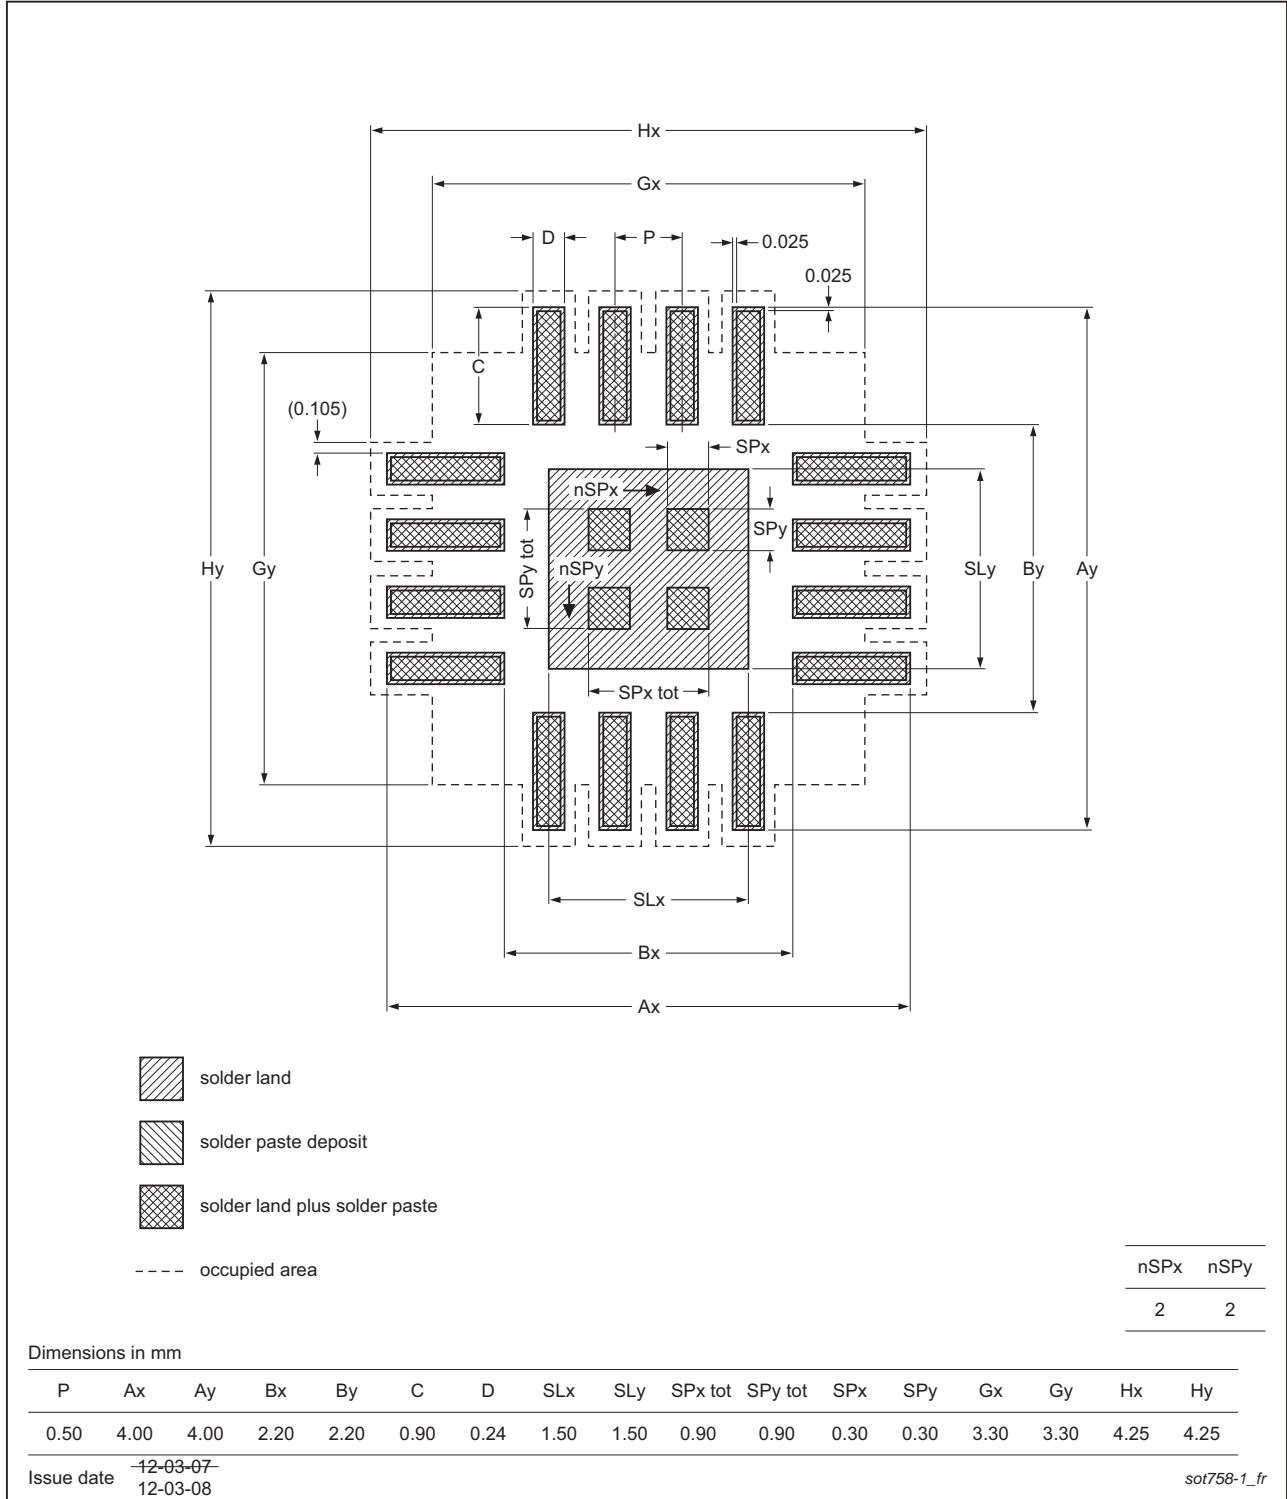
PCB footprint for SOT758-1 (HVQFN16); reflow soldering
